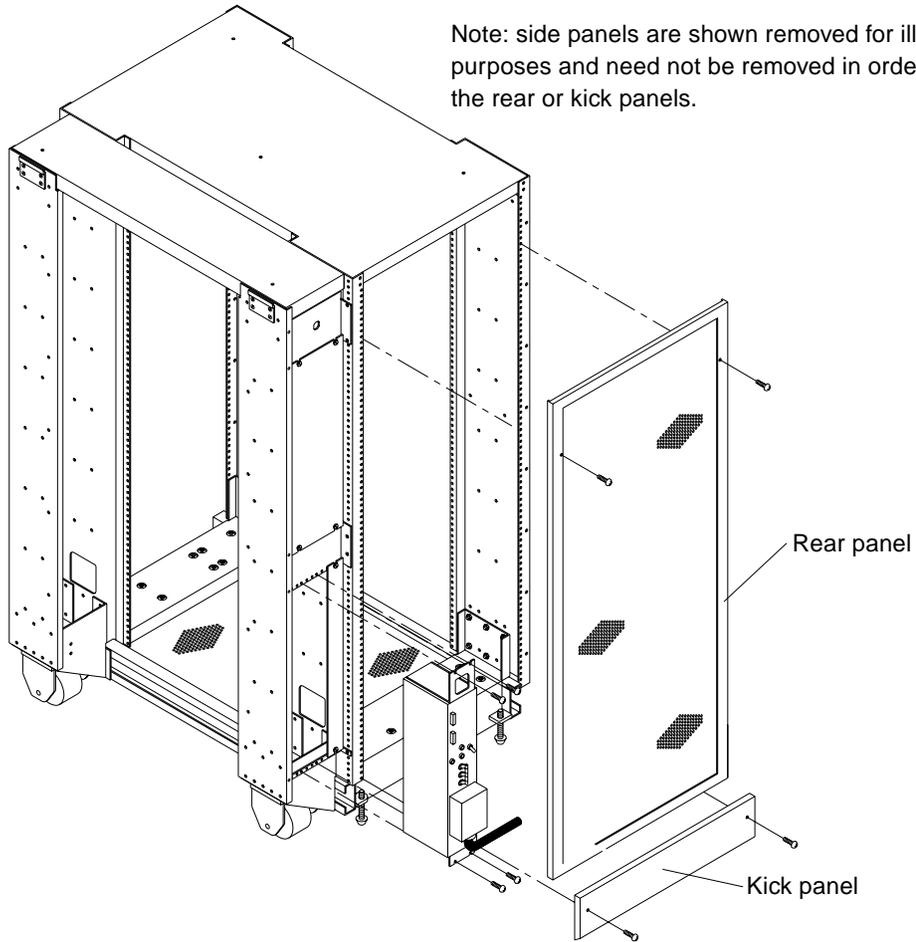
Rear Panel and Kick Panel Removal and Replacement
